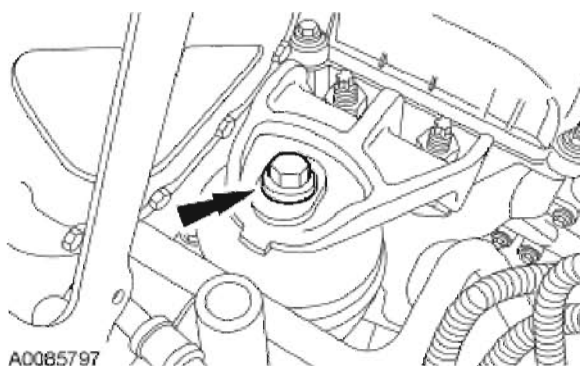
Locating Rear Transaxle Mount Bolt
